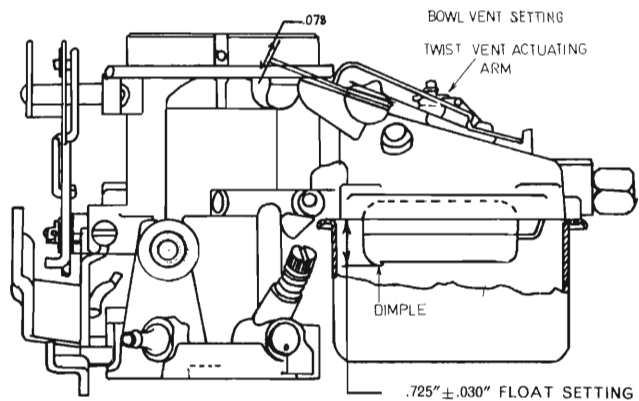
Side view showing fuel float setting and vent valve opening setting
